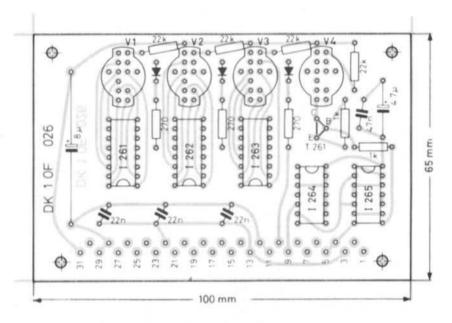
Component locations on PC-board DK 1 OF 026 (decoder and indicator module)
